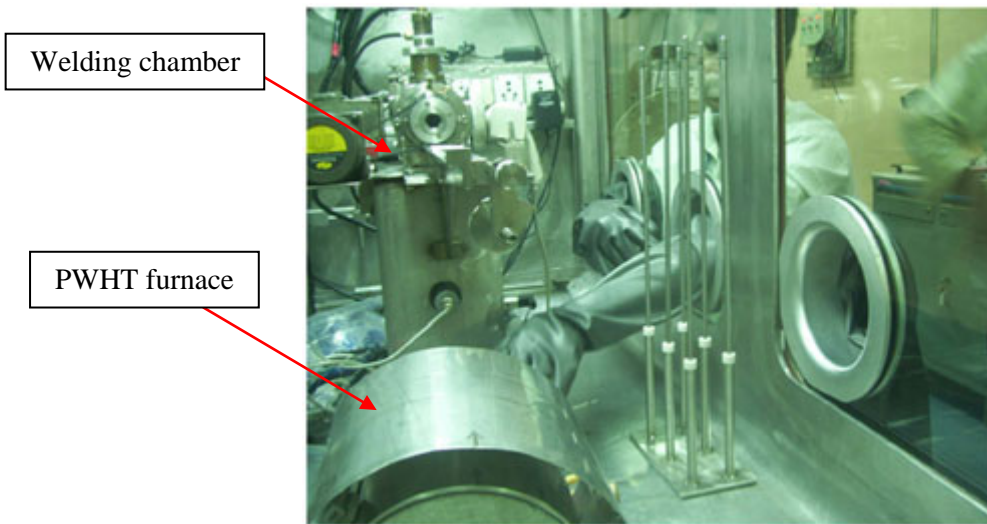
Welding glove box with welding chamber and PWHT furnace
